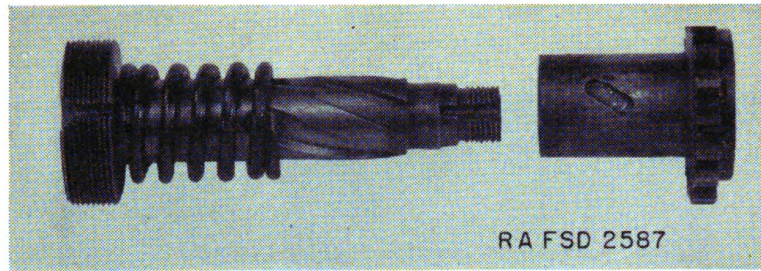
Elevating mechanism—backlash pinion and shaft disassembled, quadrant sight, M1918.
